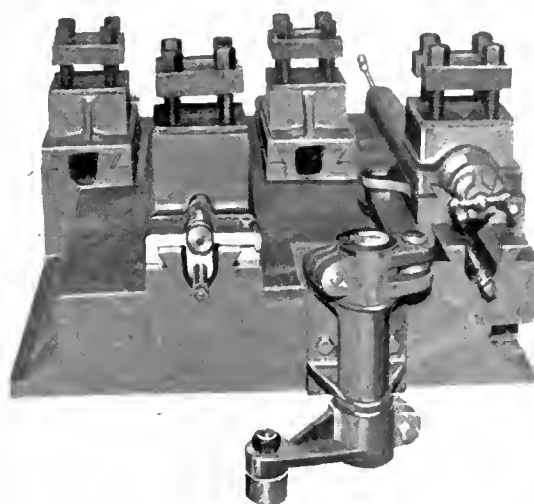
REAR VIEW OF FOUR-POST TOOL HOLDER SHOWING TAPER FORMING ARRANGEMENT.
